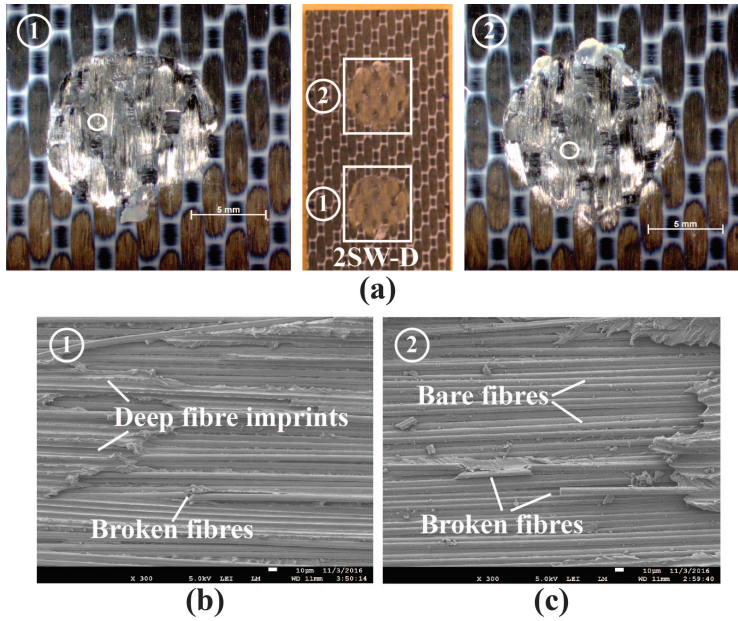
(a) Representative fracture surfaces of the 2SW joints sequentially manufactured with displacement-controlled welding process at 0.23 mm displacement, 60.8 μm peak-to-peak amplitude, 1500 N welding force and 1000 N/s increasing force during the vibration phase. The numbers indicate the welding sequence. SEM micrographs (b) and (c) show the details of the areas circled in the fracture surfaces of Weld 1 and Weld 2, respectively. The scale bars are 5 mm (for microscopy) and 10 μm (for SEM).
